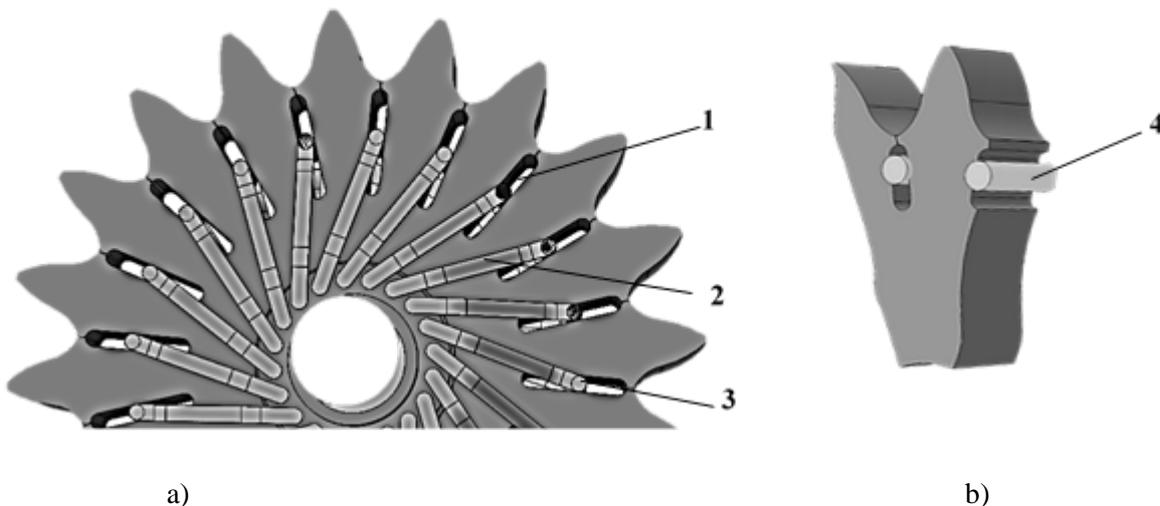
Modified design of gear wheel with self-guided mesh stiffness:
